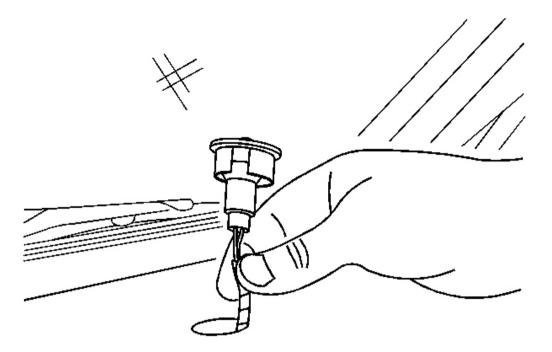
View Of Ambient Light Sensor Courtesy of GENERAL MOTORS CORP.
